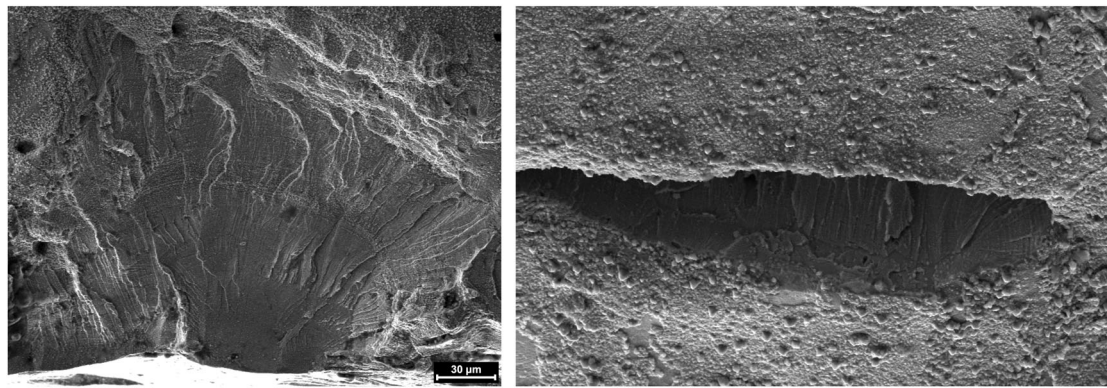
Typical TG-C crack formed in the fracture surface (left) and on the sample surface (right).
